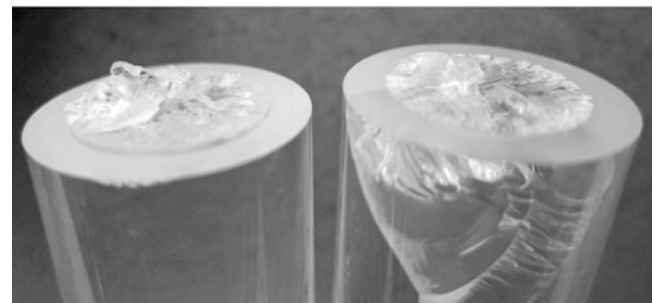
Examples of spiral, spiral/flat and nominally flat fracture surfaces
